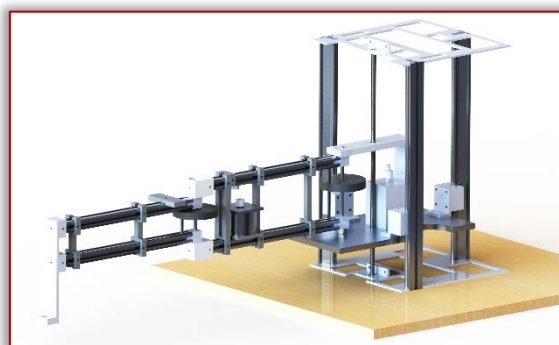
CAD of the robotic arm assembly modelled in Solidworks
